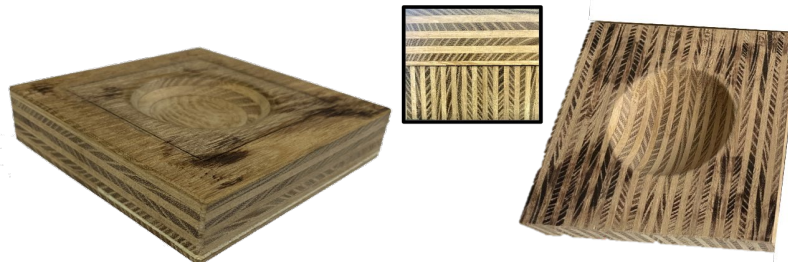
Black locust composite drawing tools: horizontal (left), perpendicular (middle) and hybrid structure with 2mm sheet metal (right).
